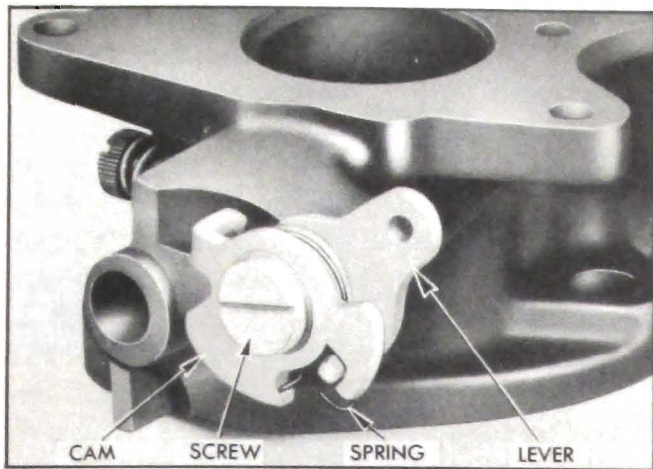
Fast Idle Cam, Spring and Trip Lever
